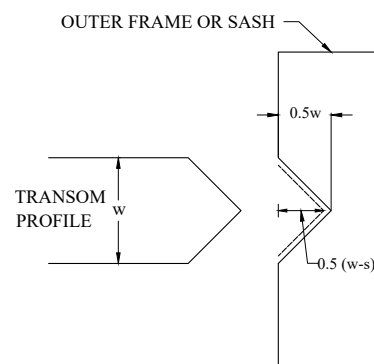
WELDING OF T JOINT SPECIMEN
